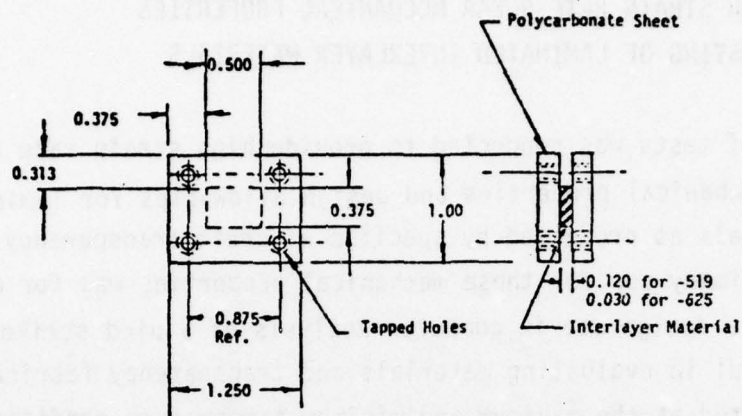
Shear Test Specimen (Z7942633-519, -625).
